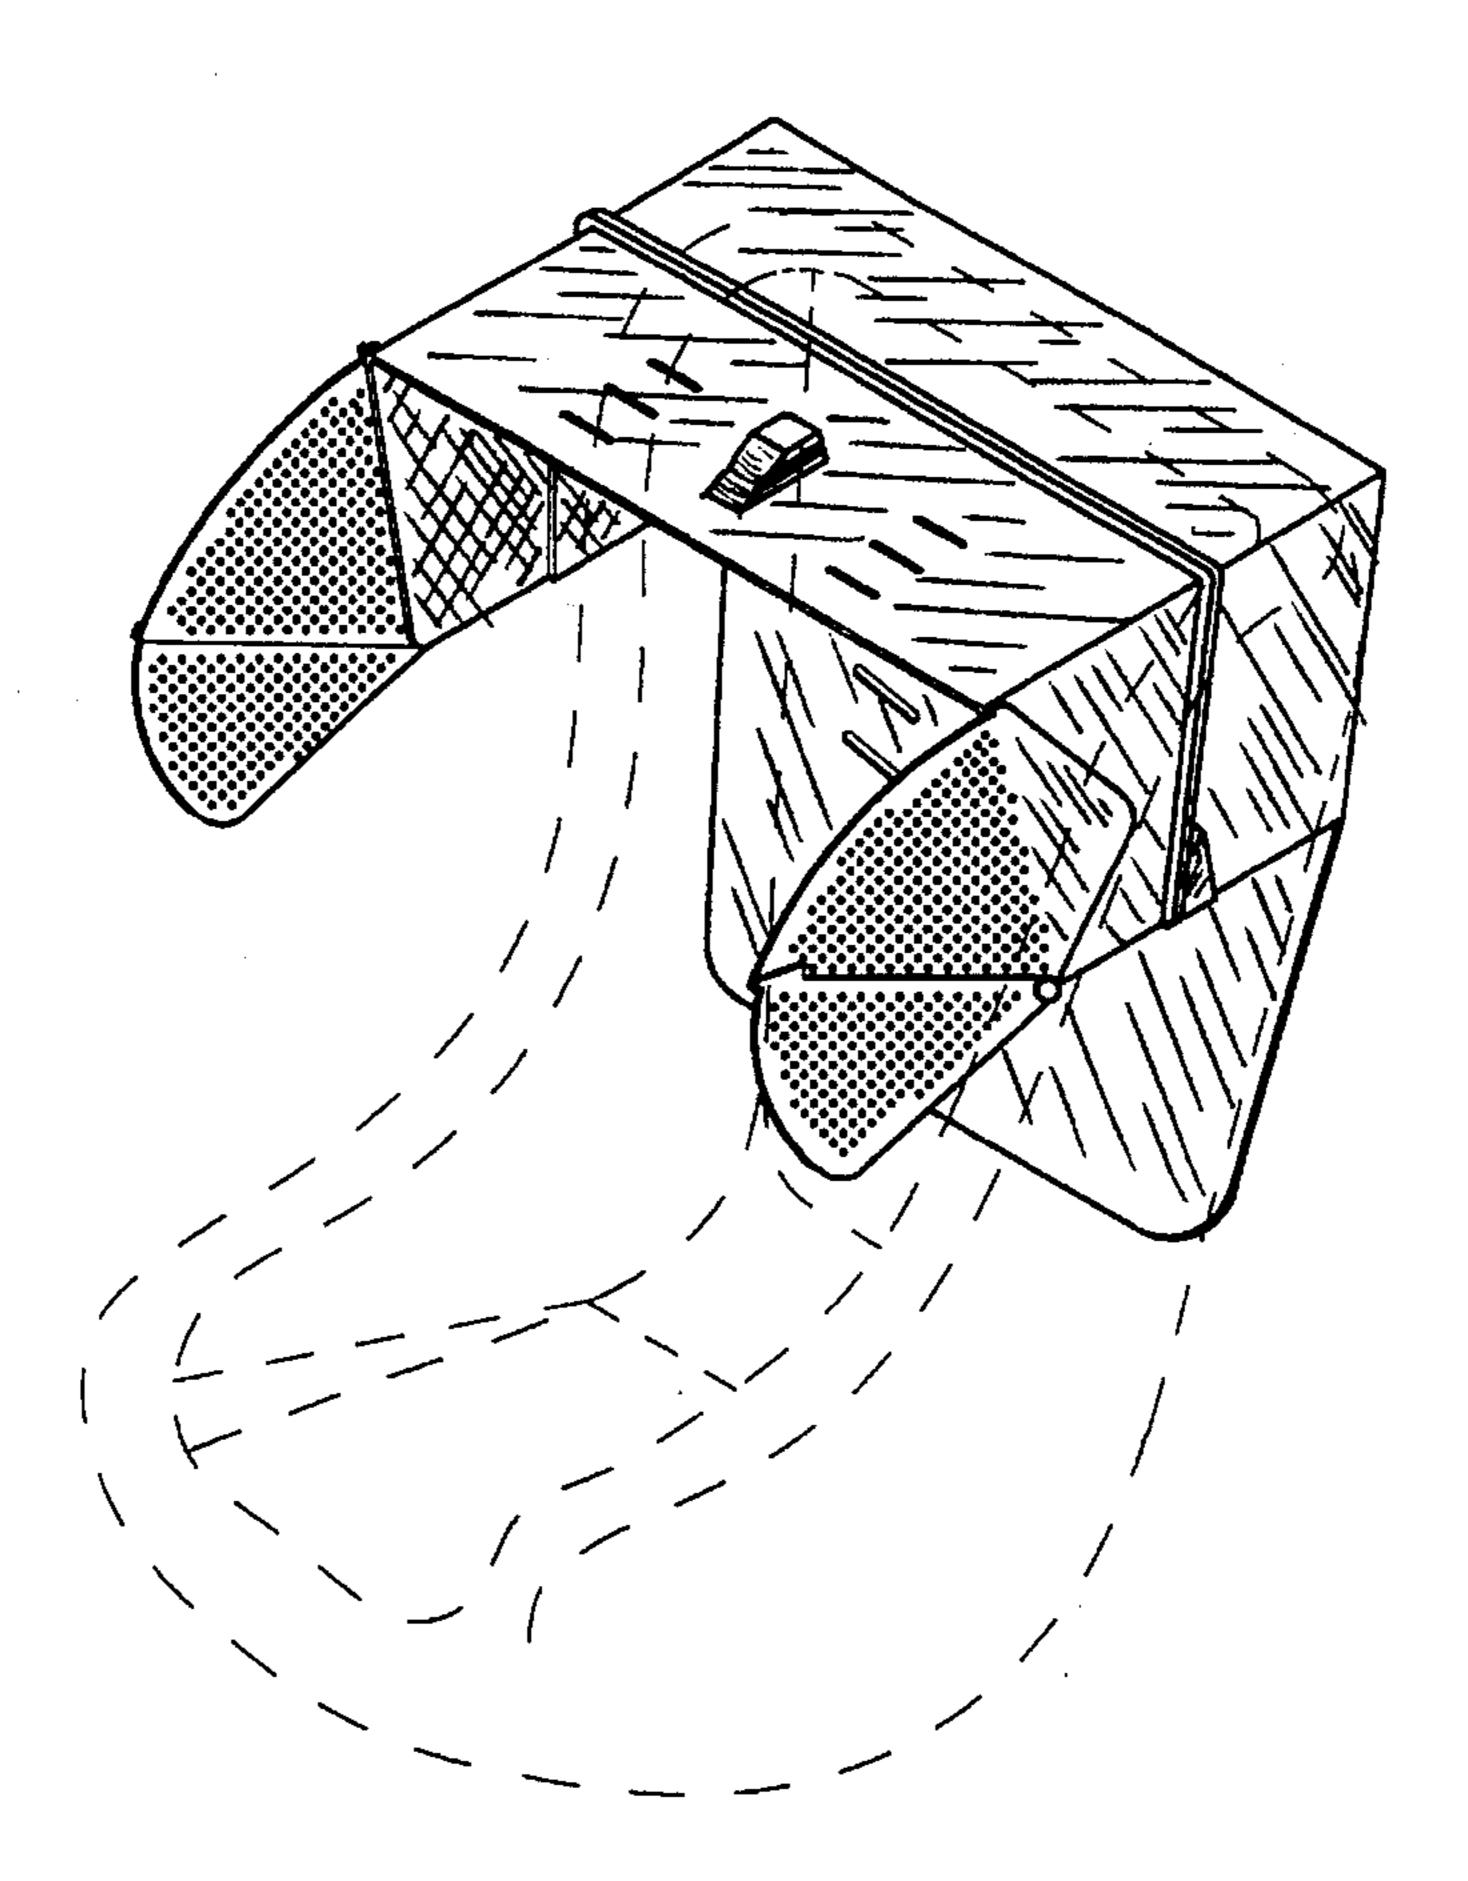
is a isometric view of the car seat visor as shown in FIG. 6 with also the right first and second movable sun side guards in the fully open position;
